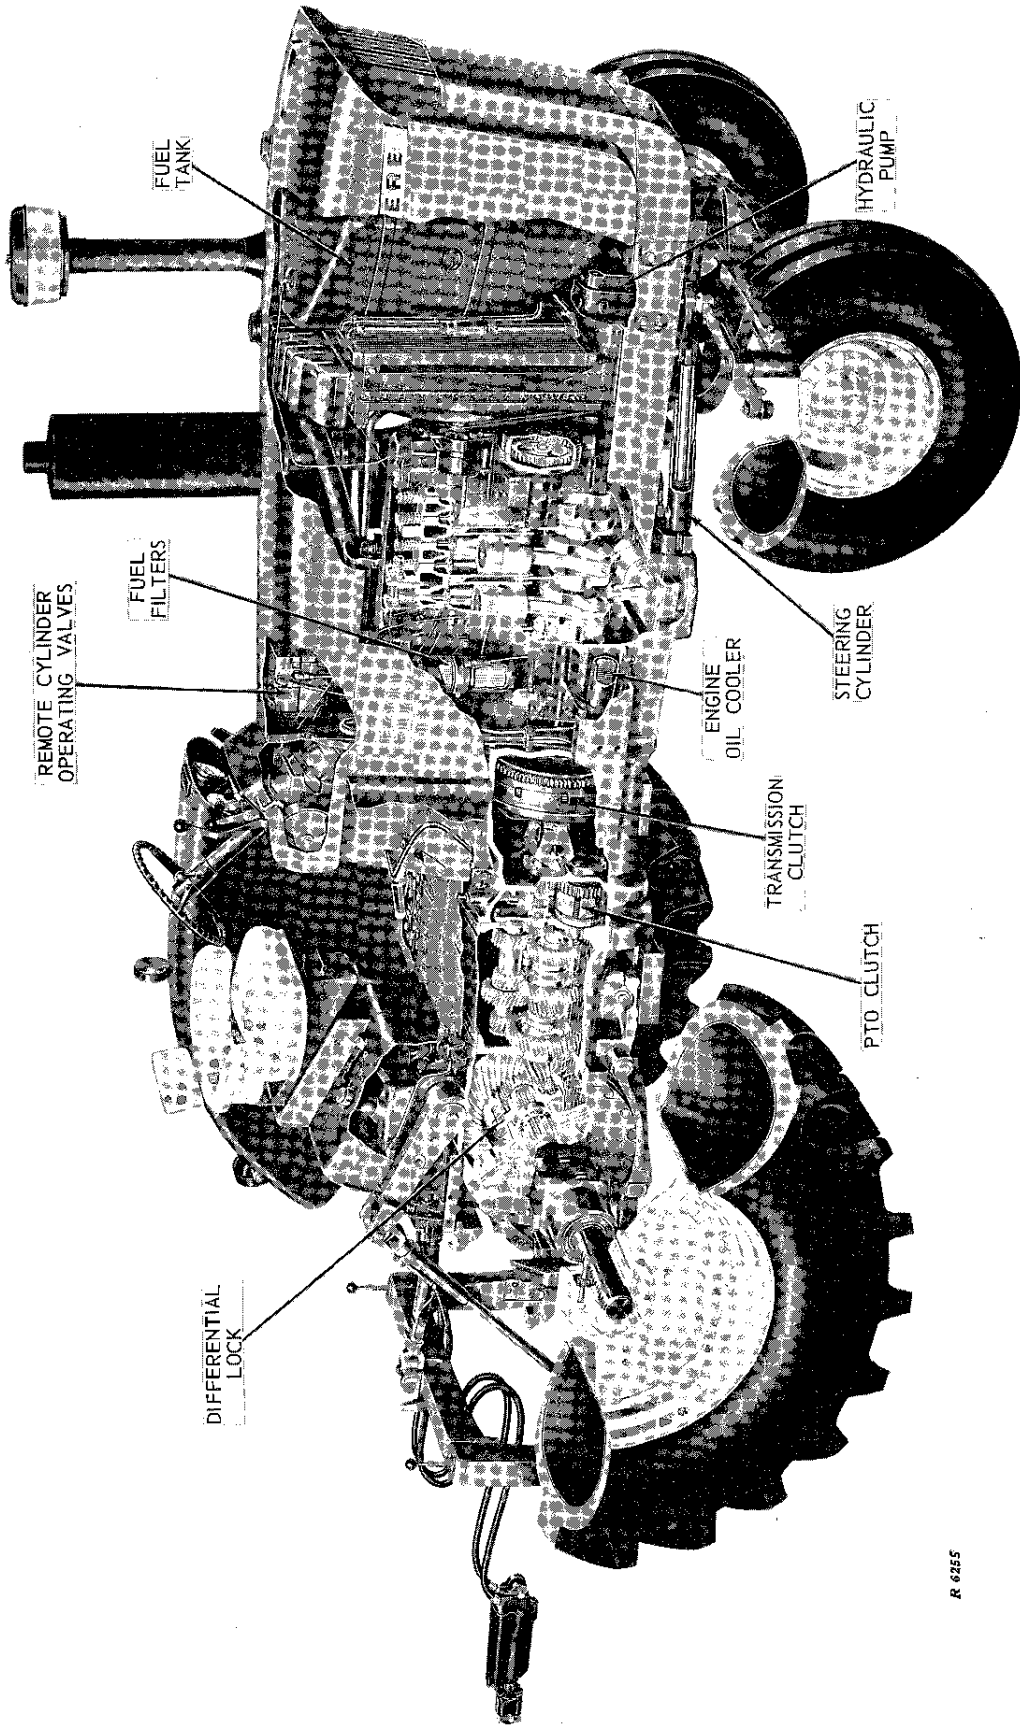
Cutaway View of John Deere 5020 Standard Tractor
